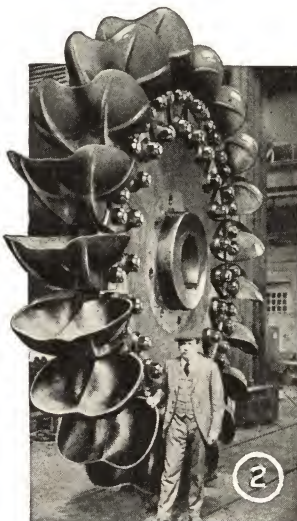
Illustrates a Large Impulse Wheel with Buckets Such As Used in Record Size Impulse Turbines Built by the Company for Heads up to 2500 Ft.
